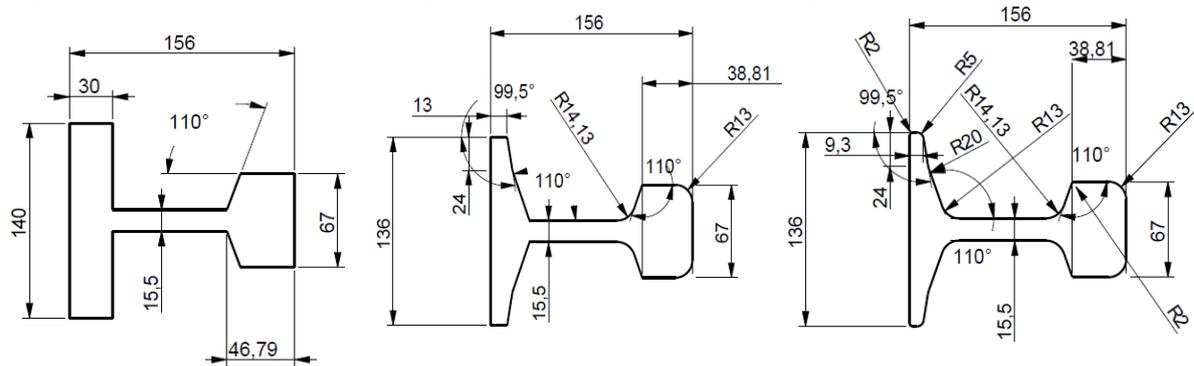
Section at pass-15    Figure 3.17 Section at pass-16    Figure 3.18 Section at pass-17
